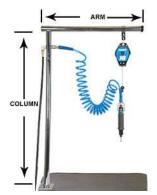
Tool balancer (EXPRESS ASSEMBLY PRODUCTS, LLC, 2018)
